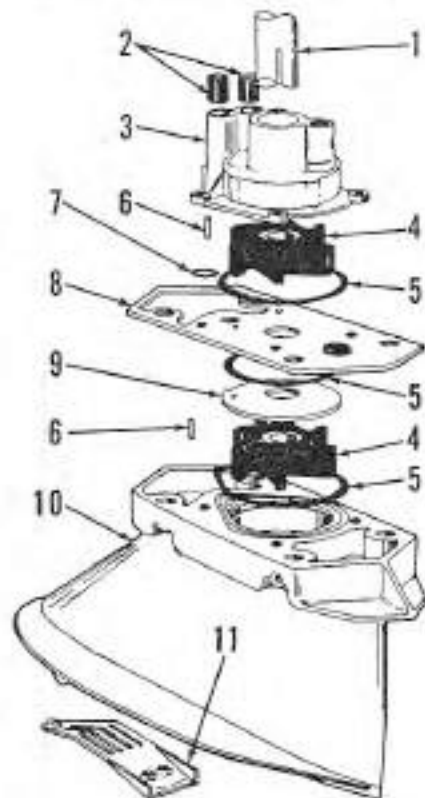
Exploded view of pump housing and associated parts used on Fleet Scott models. On Fishing Scott, pumps are located in lower unit gearcase.
